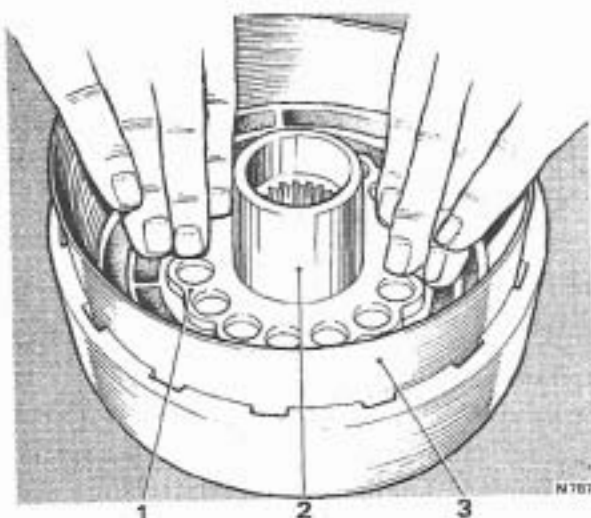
FITTING THE DIRECT CLUTCH PISTON
